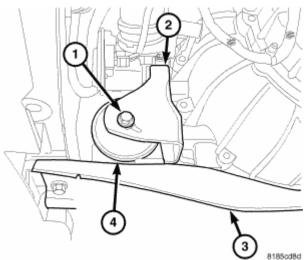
FRONT MOUNT THROUGH BOLT Courtesy of CHRYSLER LLC
